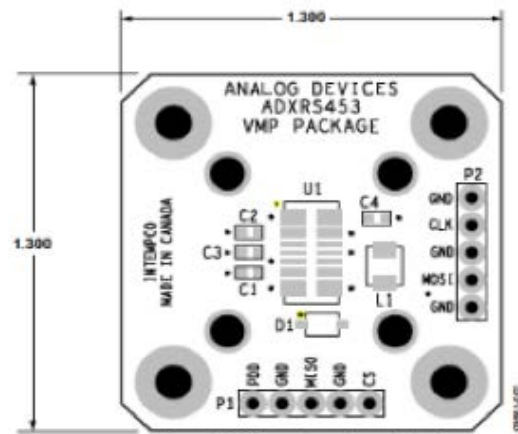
ADXRS453 Evaluation Board Mechanical Drawing
